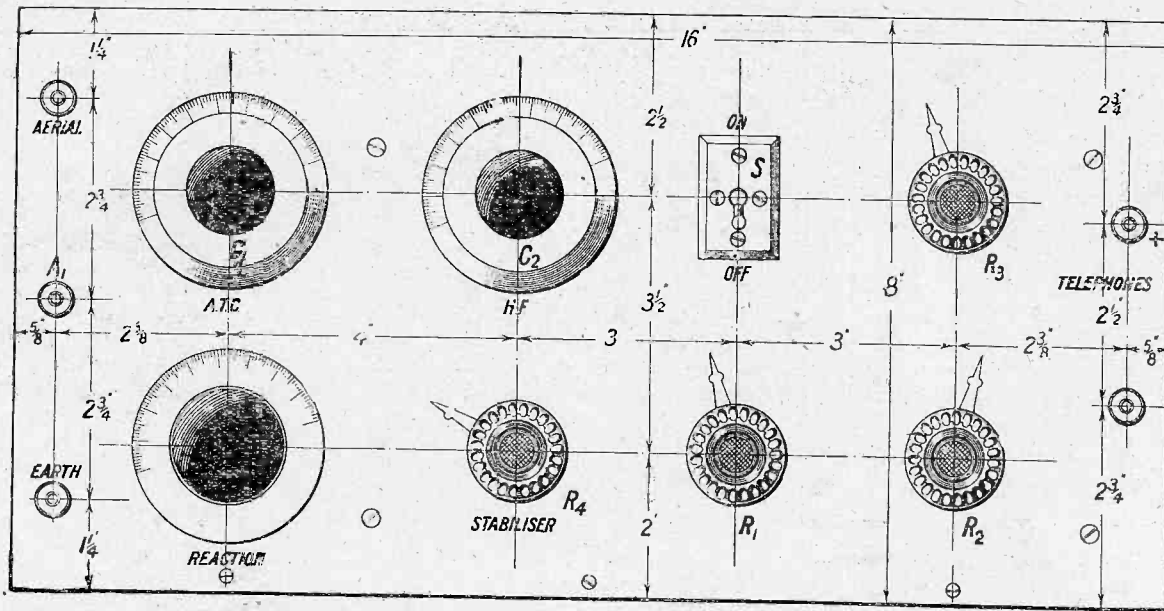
The layout of the panel and drilling dimensions. Blueprint No. 125A, Post Free 1/6.
